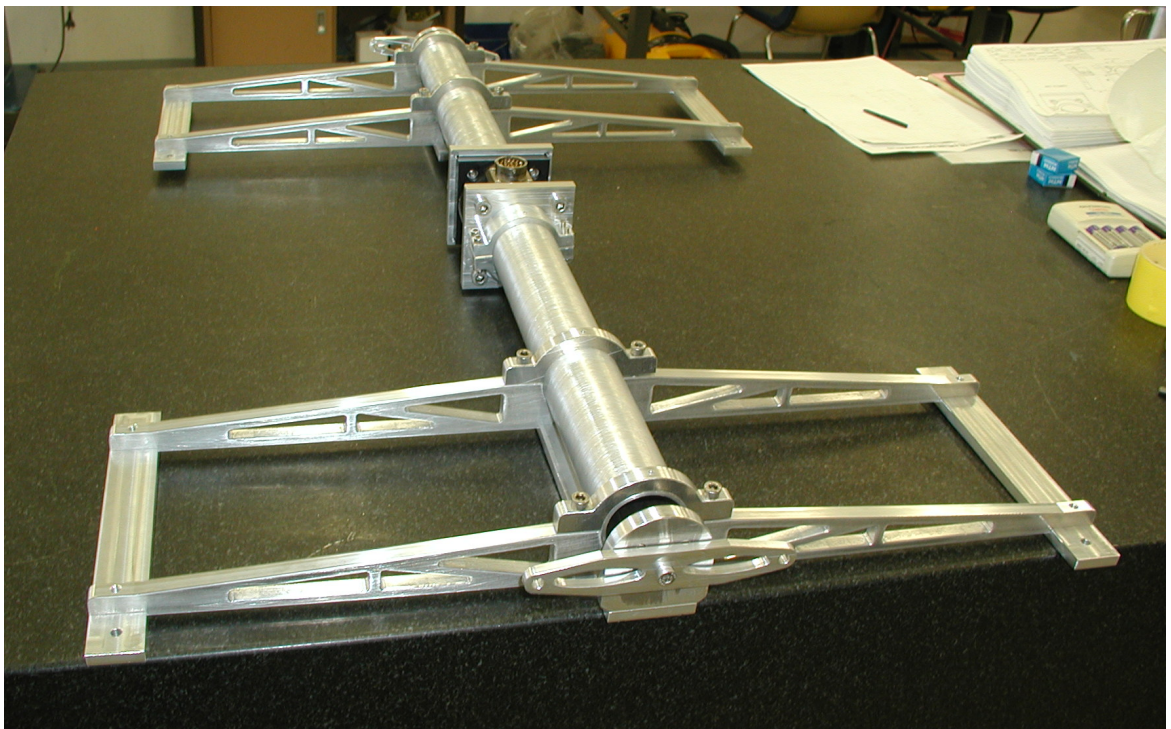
Transverse cross bridge aluminium tube beam, bare system. Detail designed and assembled by Timothy Lilienthal
